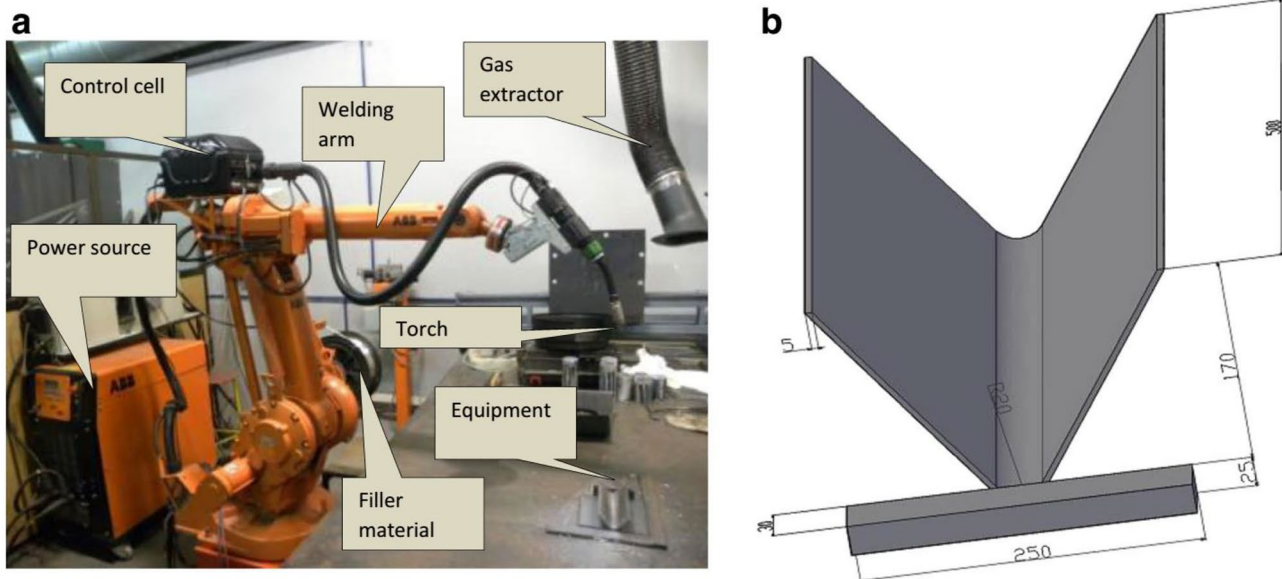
(a) Photograph of the welding robot with the GMAW torch installed. (b) Tool used in the welding of the aluminium tube [22]
